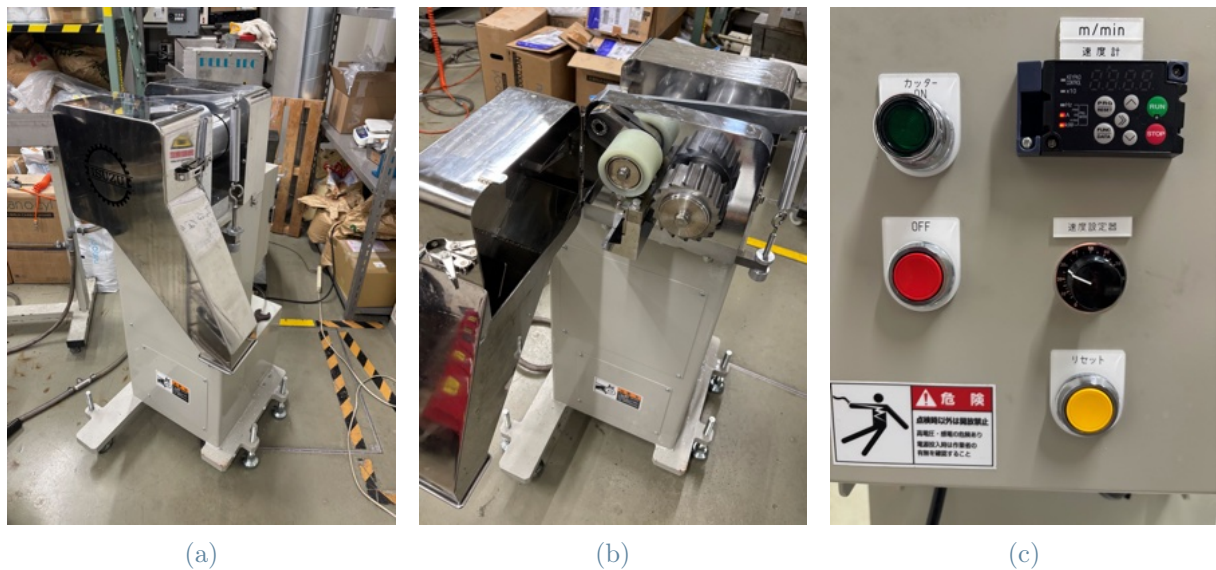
Pelletizer: (a) pelletizer overview; (b) pelletizer cutter; (c) pelletizer controller.
